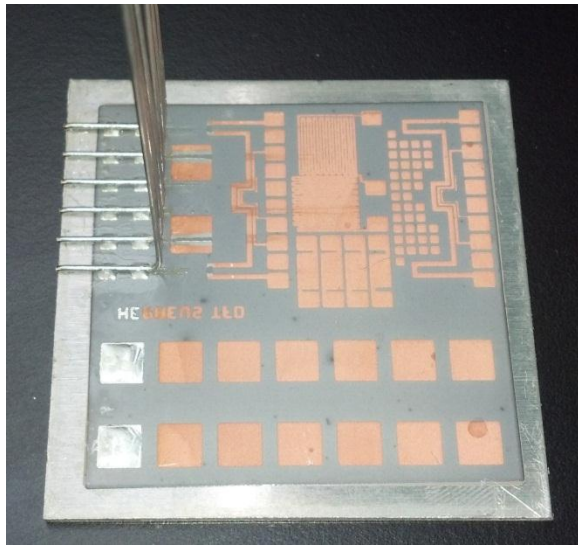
Adhesion Part with Lead Attachment and Hooks Removed.
